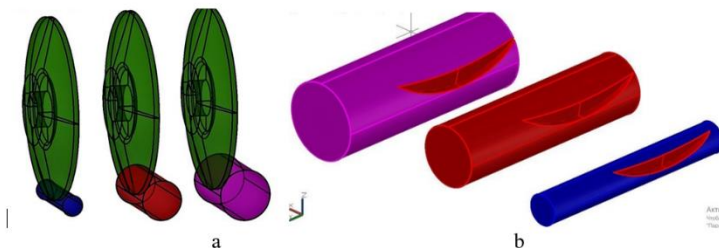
Contact spots of the dished grinding wheel (a) with cylinders simulating the involute tooth profile on the head (purple), stem (blue) and in the area of the dividing cylinder (red) (b)
